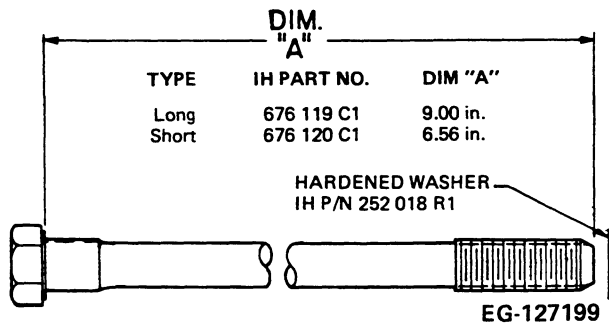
“Old Style” Cylinder Head Bolt and Hardened Washer
